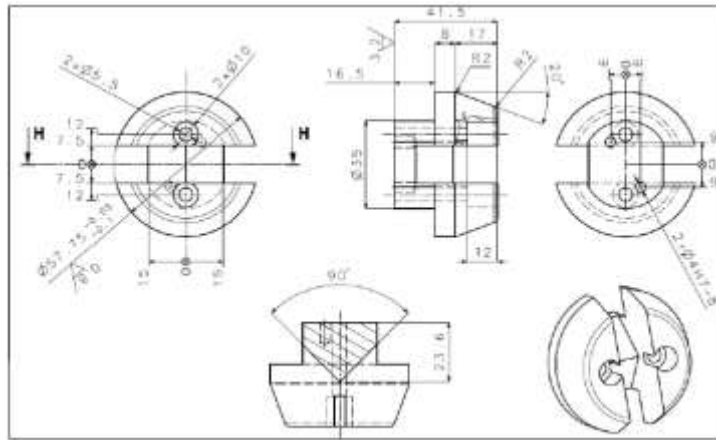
Mechanical drawing (left) and 3D presentation (right) of produced component
